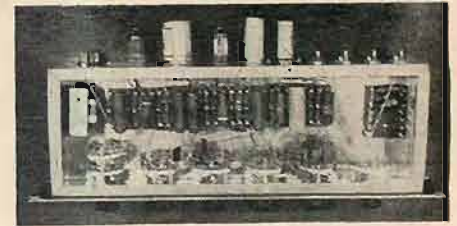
Bottom view of one of the control amplifiers illustrating the uncluttered, orderly layout possible with terminal board construction.
